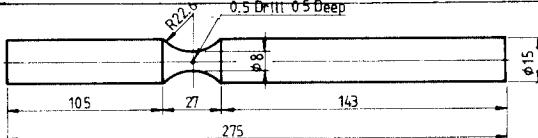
Shape and dimension of fatigue test specimen (unit: mm)
